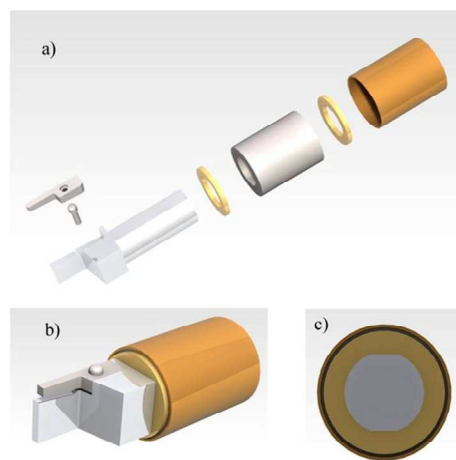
CAD model of the parting-off tool. (a) Exploded view. (b) view of the assembled tool. (c) View of the back of the tool.
